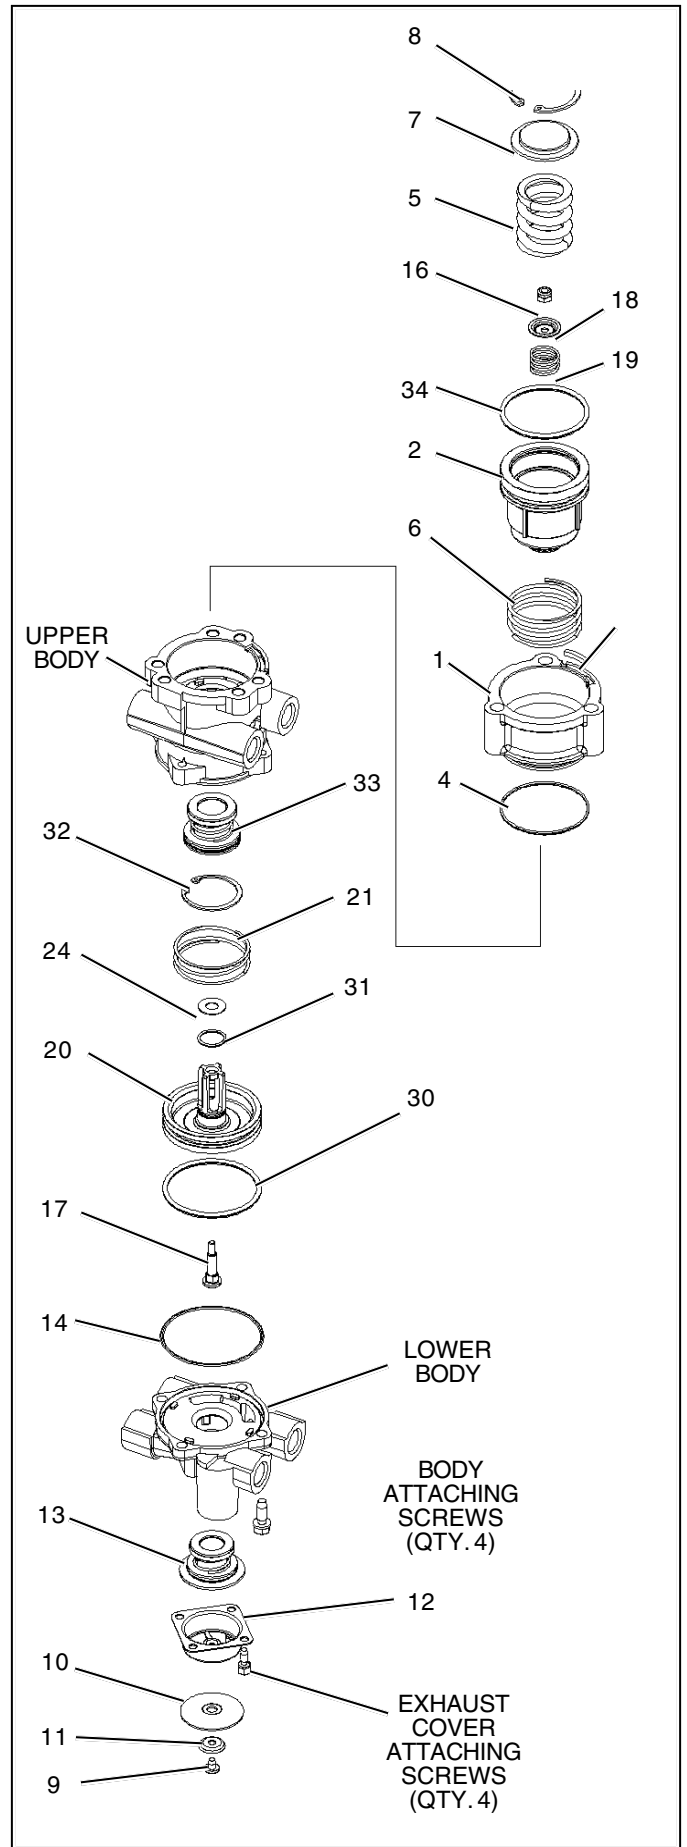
E-10P BRAKE VALVE - EXPLODED VIEW
